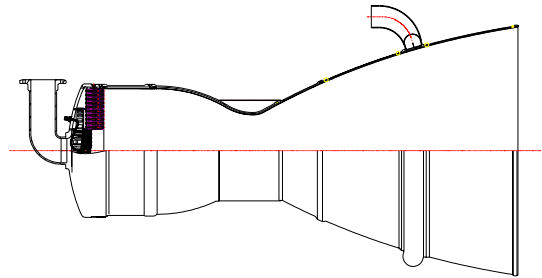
Overall Geometry of 75 ton LRE Combustion Chamber
